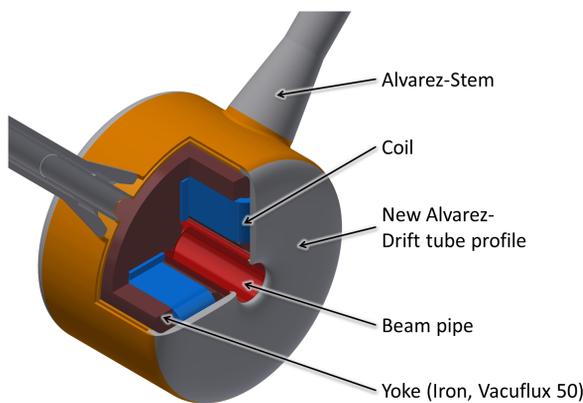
CAD-model of the drift tube with the new shape profile and an integrated quadrupole singlet. The first and shortest drift tube has a total length of 111.3 mm, an aperture of 30 mm, and its diameter is 180 mm.
